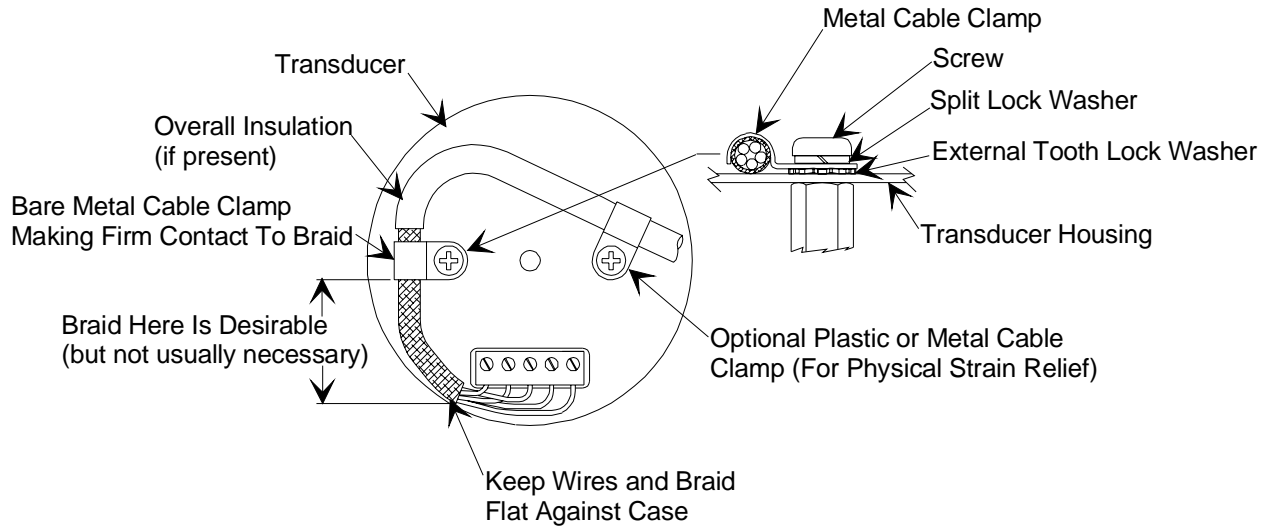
Preferred Method To Connect an Overall Metal Braided Shielded Cable
